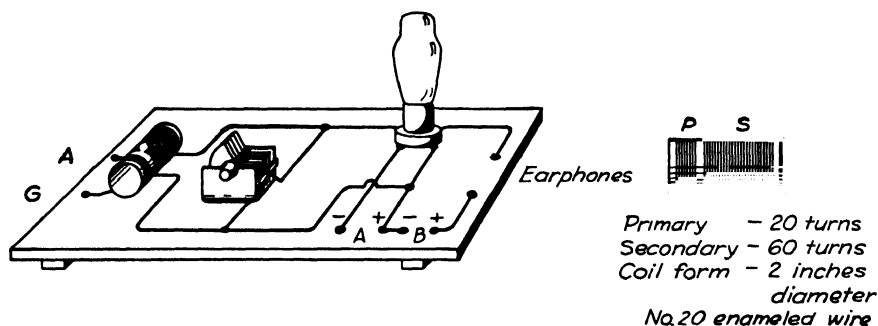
Board layout for the coil-condenser tuned receiving circuit.
